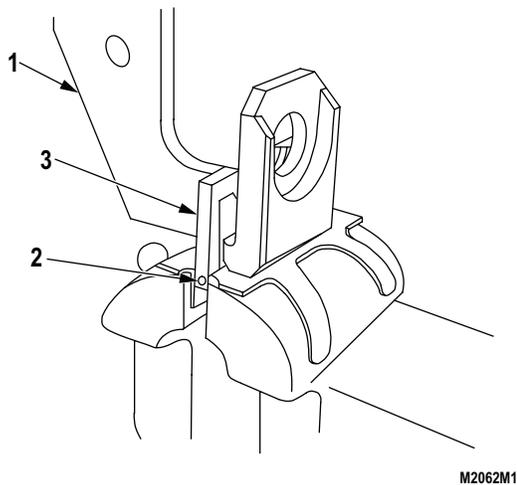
Primary Drive Lever and Vertical Cam Assembly Disassembly.
